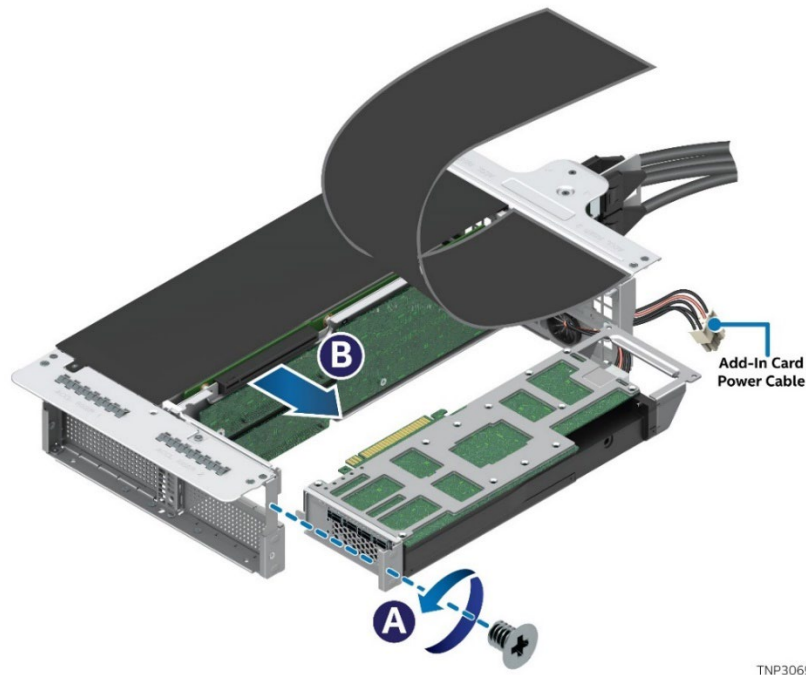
Removing Accelerator Add-In Card from Riser Assembly
